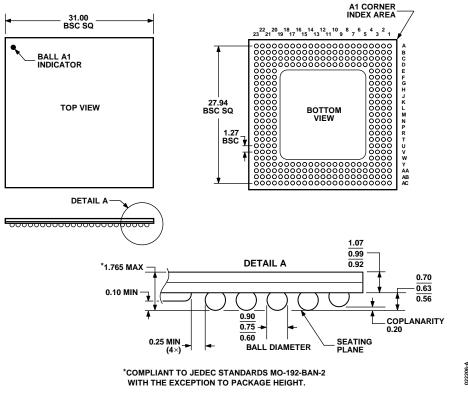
304-Ball Ball Grid Array, Thermally Enhanced [BGA_ED] (BP-304) Dimensions shown in millimeters
